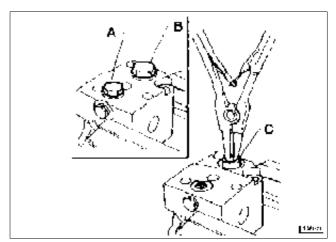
Disassembling the nonreturn valve. A Pilot/Control valve cap screw
